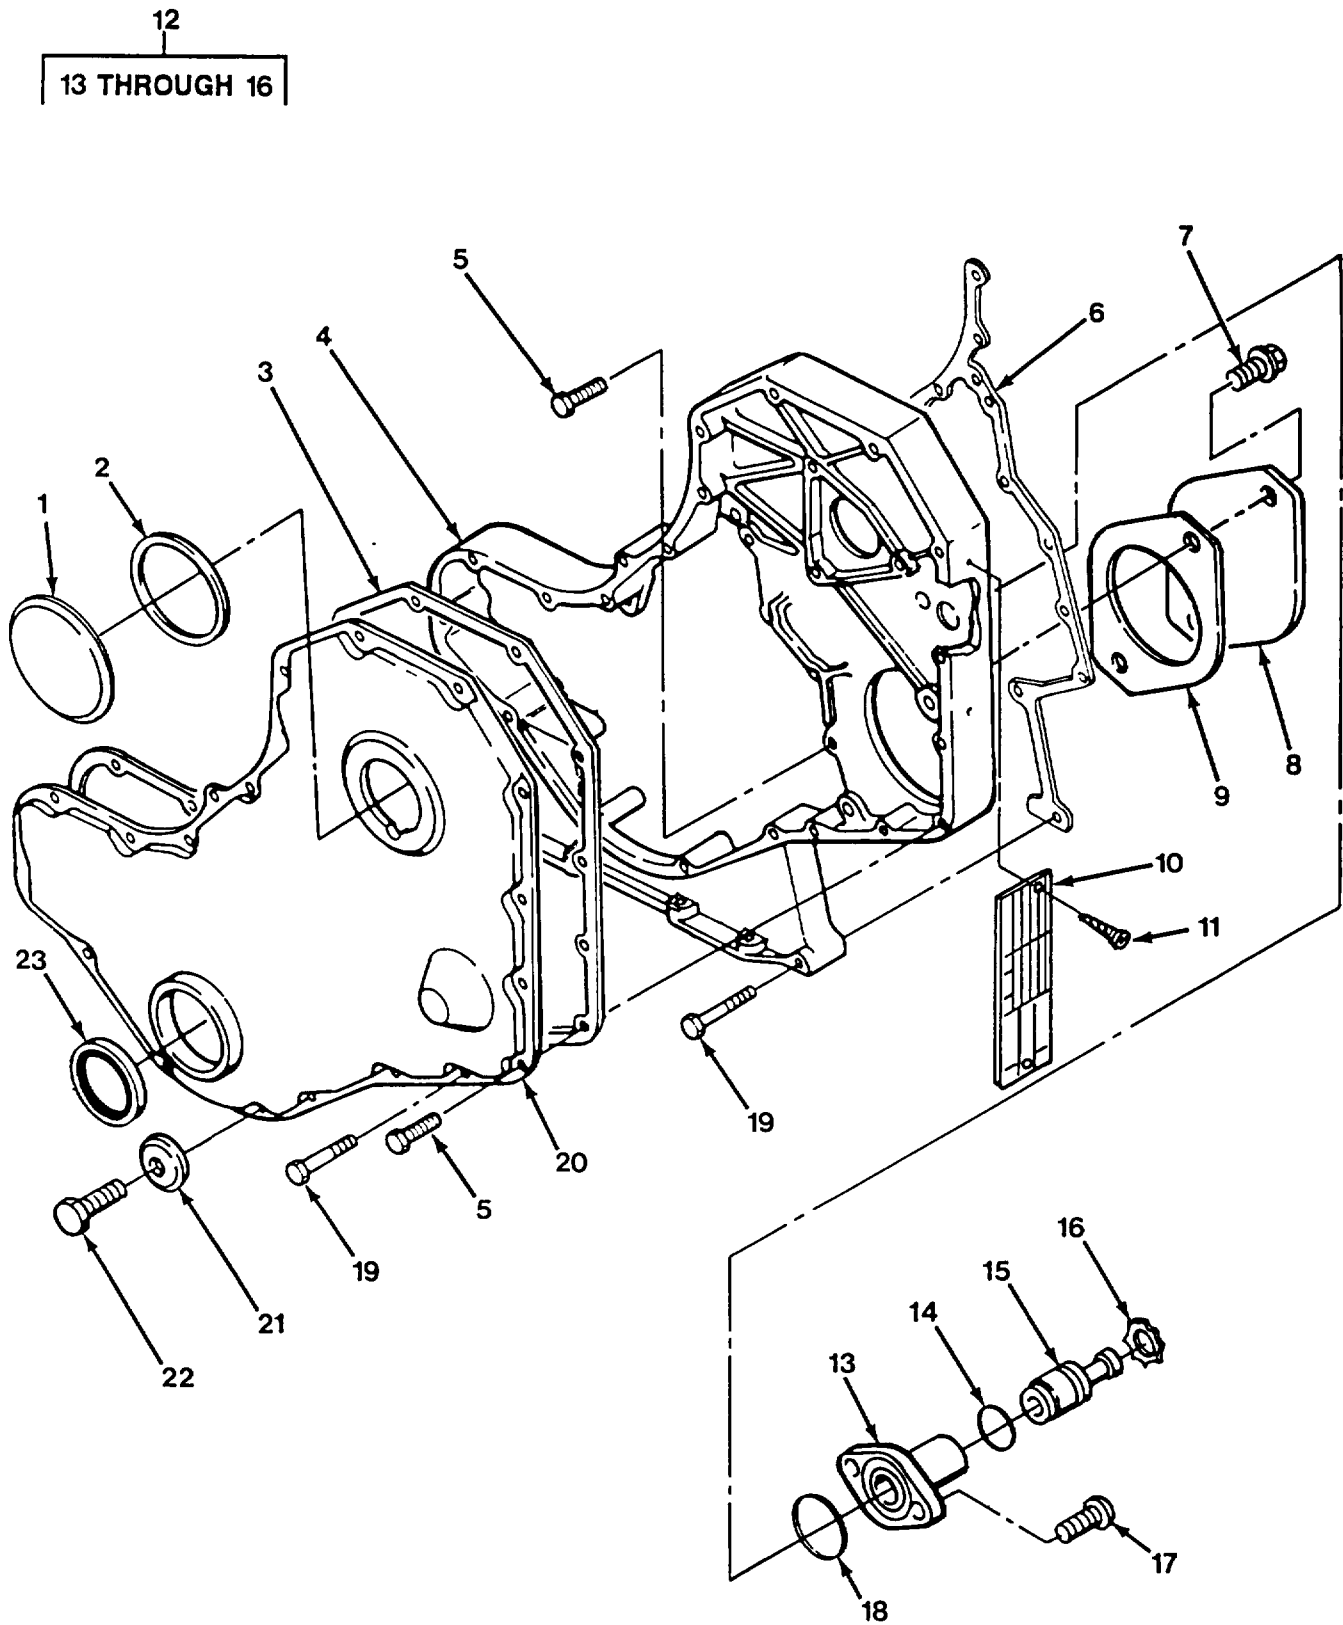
TIMING GEAR COVER AND TIMING PIN ASSEMBLY
